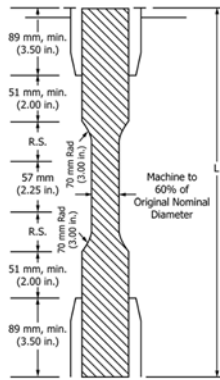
A Tensile Test Specimen Dimension (ASTM D638)
